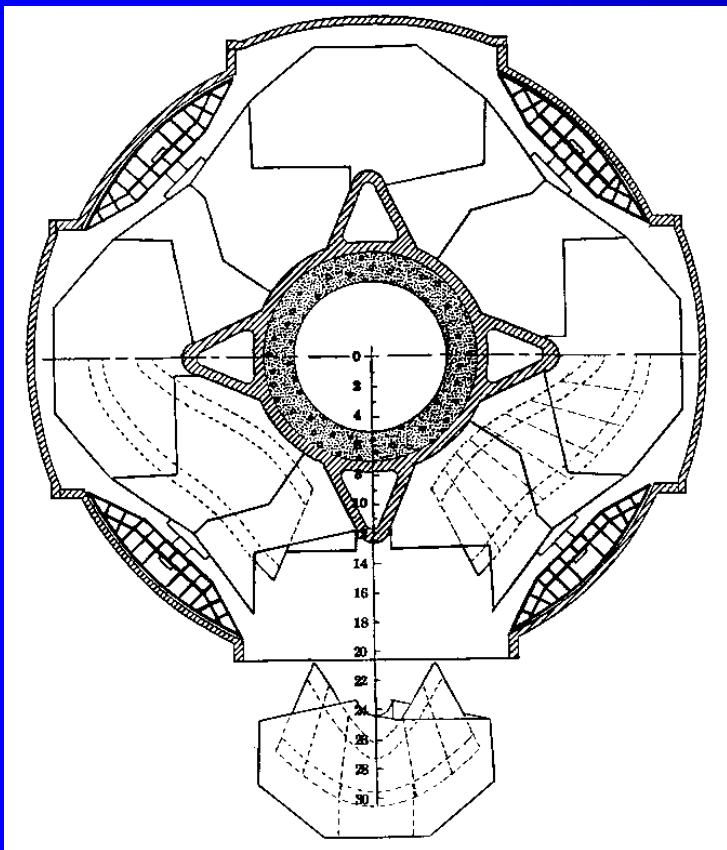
Blanket module 3 consisting of 4 segments.
